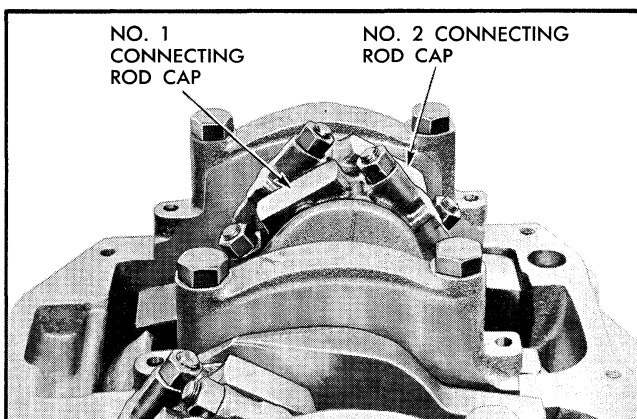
Crankshaft Positioned for Removal of No. 1 and No. 2 Connecting Rod Caps
